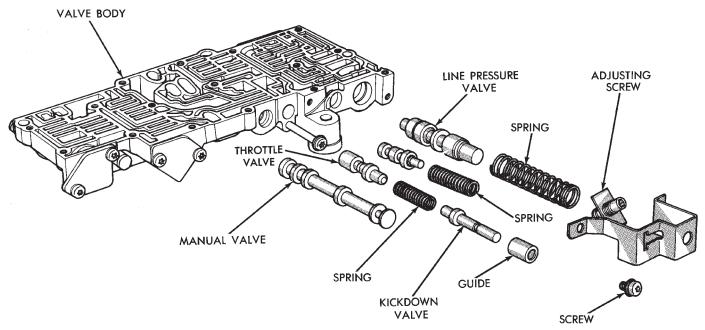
Pressure Regulator and Adjusting Screw Bracket
